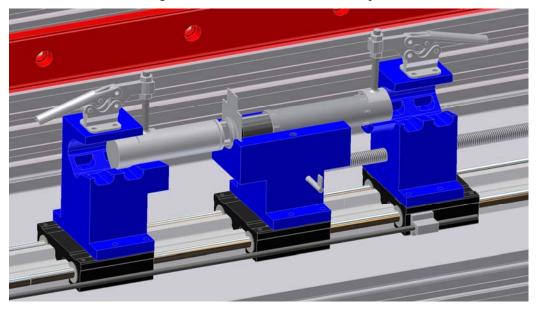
Conceptual drawing of capsule disassembly tools for removing the capsule shell.
